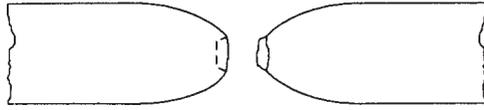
‘Cup-and-cone’ failure of a mild steel test piece
